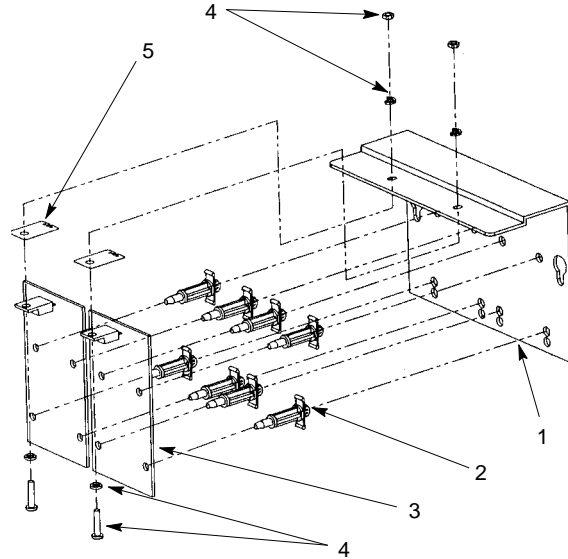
VOLTAGE REGULATOR ASSEMBLY
